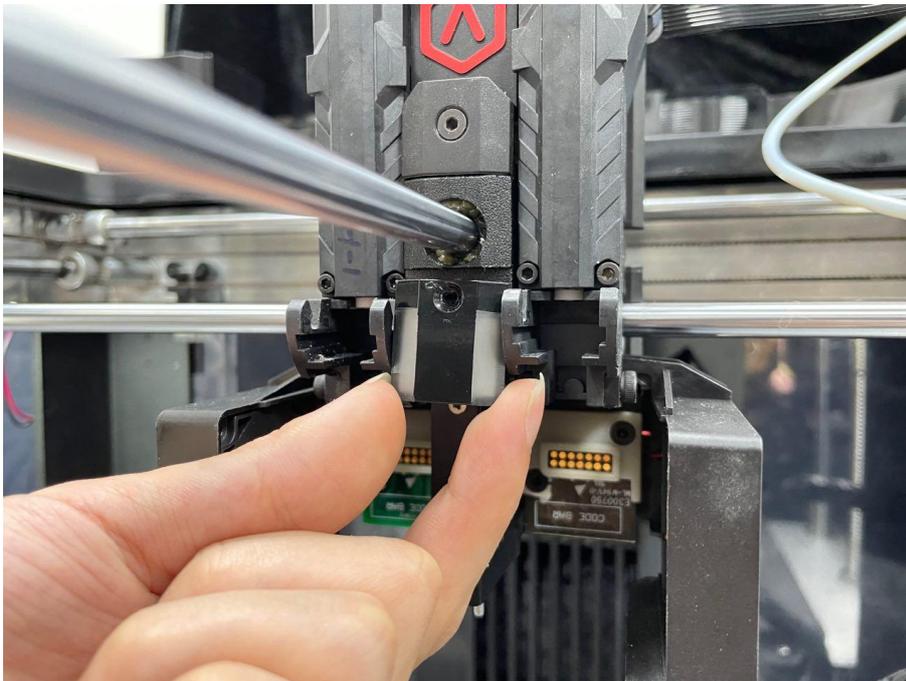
Fix the 2 securing screws on the auto-leveling assembly.
